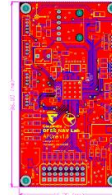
Autopilot board Figure 2. Autopilot PCB layout
